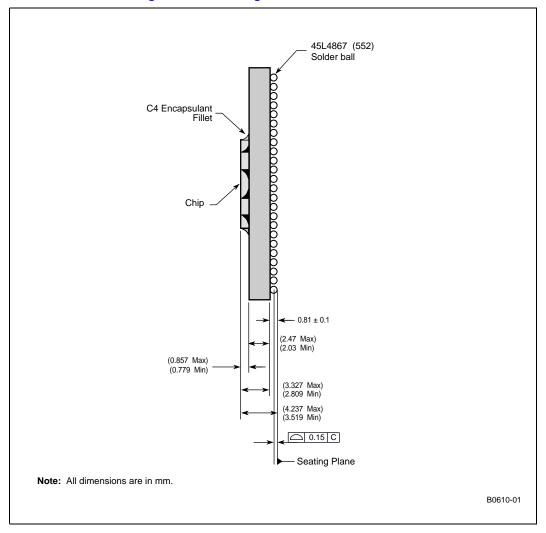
IXF1110 552-Ceramic Ball Grid Array (CBGA) Package Specification
